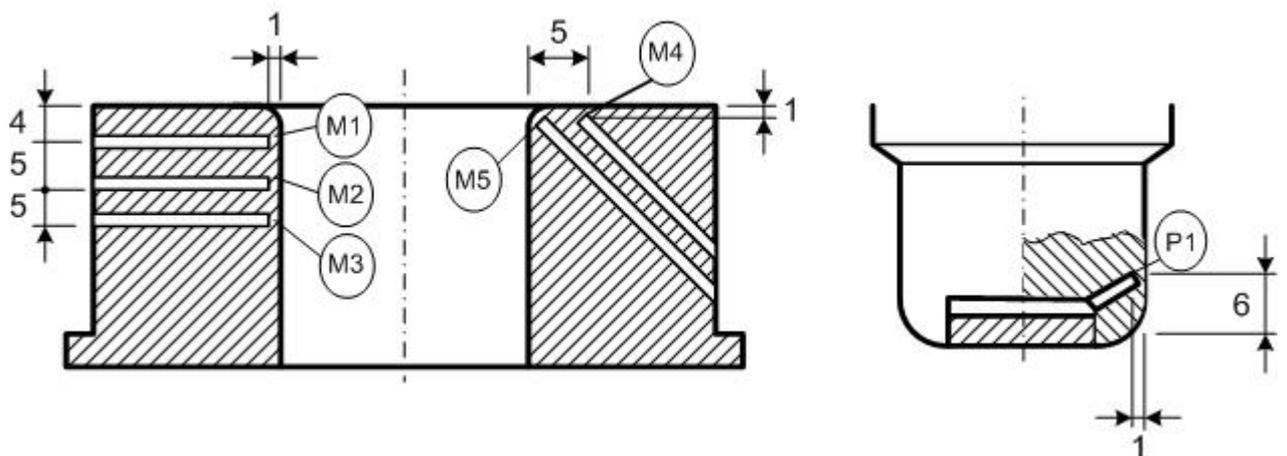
Location of embedded thermocouples in punch and die, step 4 in the production tool.
